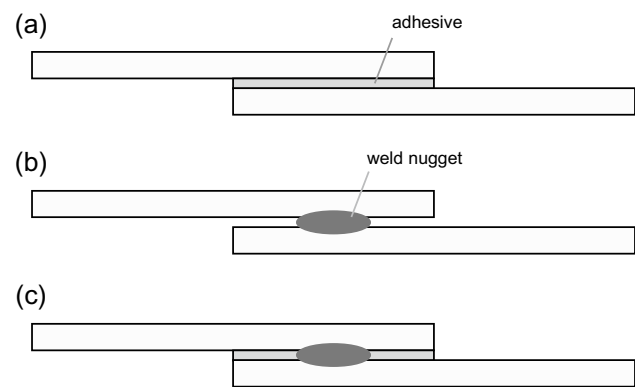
An adhesive joint a, weld joint b, and weld–adhesive joint c
